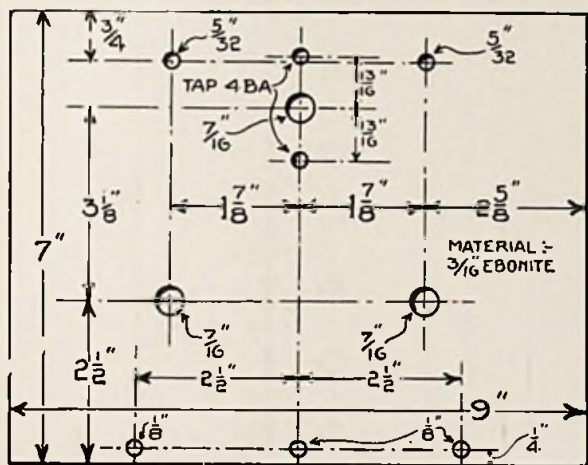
Layout of Front Panel of Seven-valve Super-het
